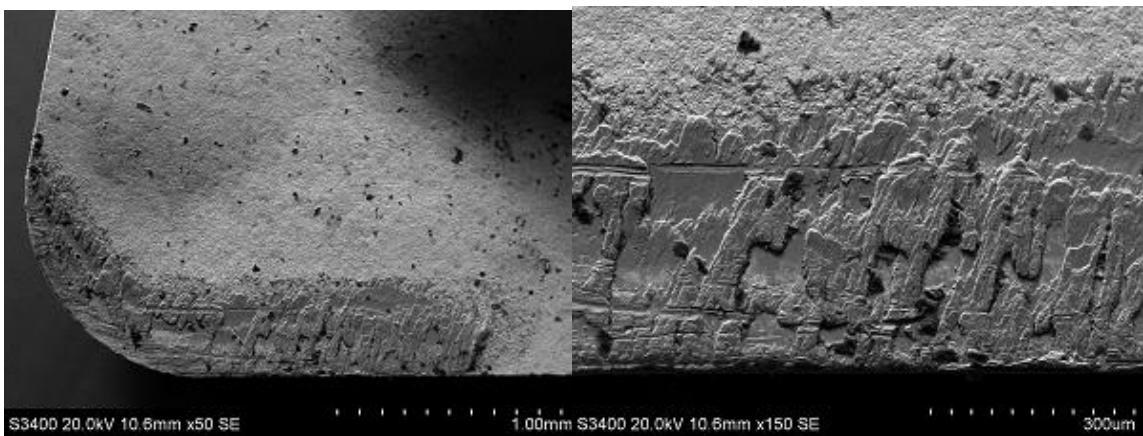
SEM images of cutting tool when cutting speed is 30m/min and feed rate is 0.30 mm/rev (left) and amplified part (right) after machining 30 cm<sup>3</sup>
